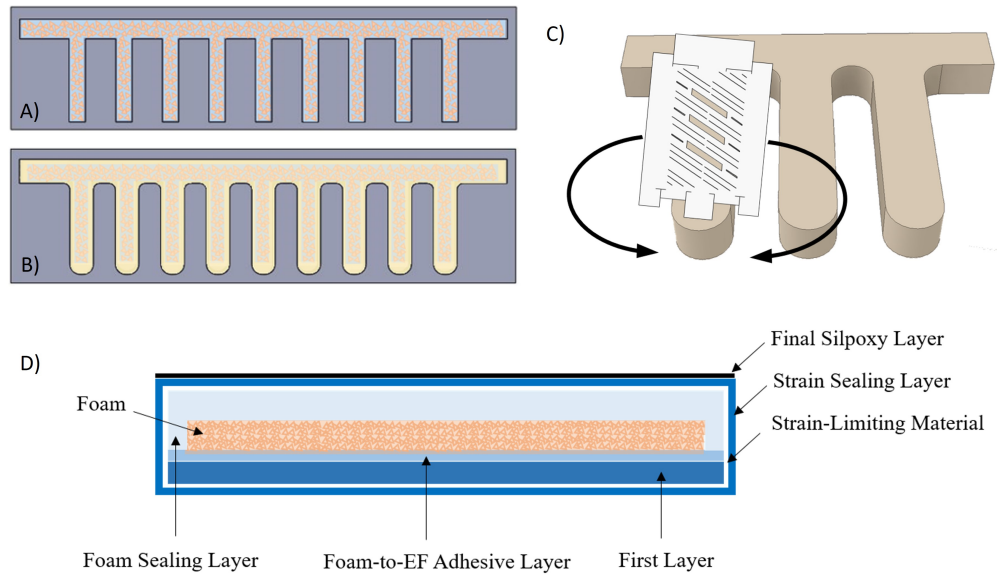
Sketches showing the process to mold a 9-legged actuator. A) Mold of laser cut acrylic to cast the poroelastic foam. B) Foam-sealing layer, also molded in the acrylic mold. C) Strain-limiting layer wrapped around each finger along the body of the foam actuator. D) Side view of a complete foam actuator. The foam is sandwiched between equal layers of silicone to avoid bulging out on one side of the actuator. The strain-limiting layer is wrapped completely around the actuator, and a final layer of silicone adhesive is applied to one side of the actuator.
